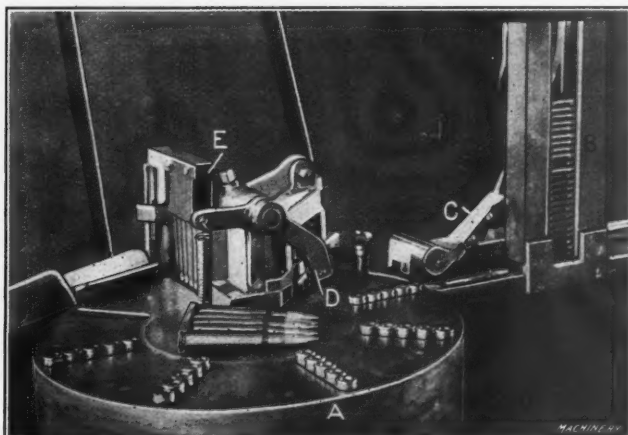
A Closer View of the Machine shown in Fig. 9, illustrating the Operating Mechanism
